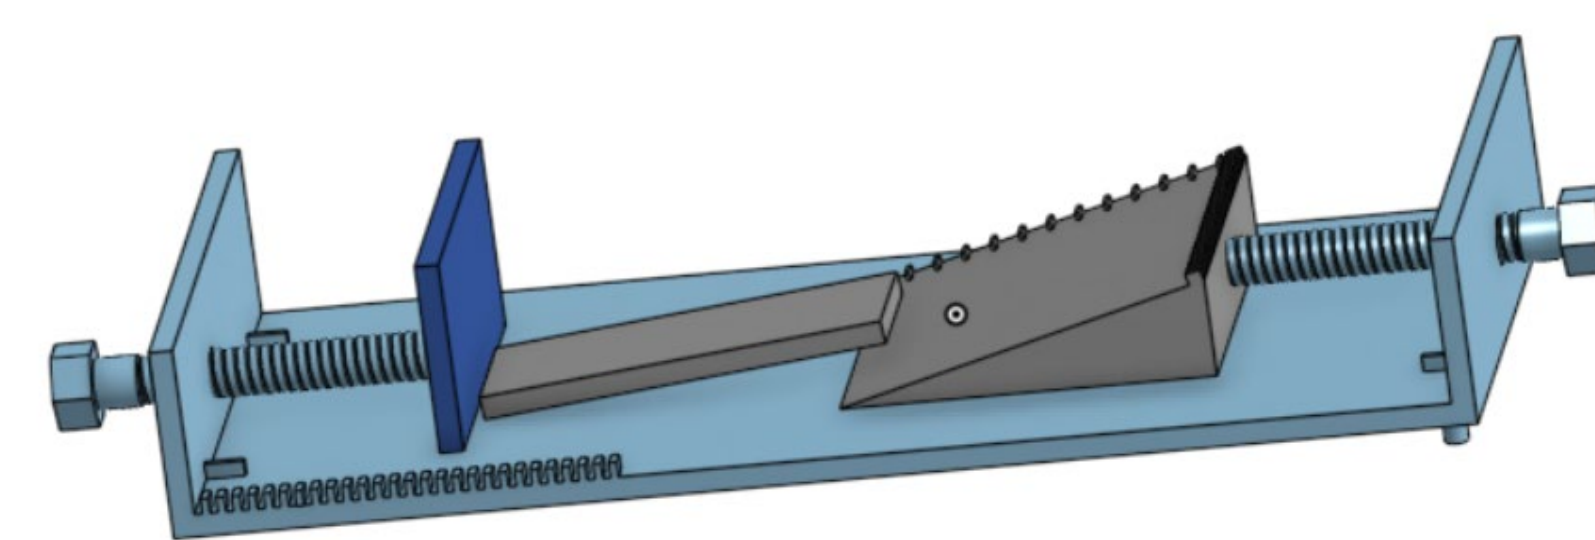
Adjustable slide holder with tilting wedge and hash marks. Screws were used to hold tilting wedge and slide in place.
